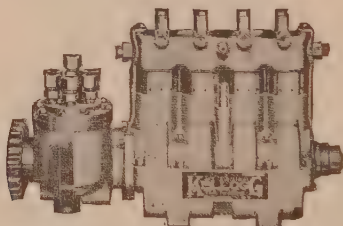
Kellogg self-starting system; view of pump and distributor. It is mounted on the engine and driven from some exposed shaft, such as water pump or cam shaft. A clutch is contained within the distributor for engaging the pump and can be operated from a convenient place on the dashboard. The distributor is timed at half the engine speed, so when the engine stops, it is in such a position that it will allow the air from the tank to rush into the proper cylinder and to each cylinder consecutively. Admitting the air from the tank to the distributor is accomplished by the simple pressure of a button on the dash. Aside from the foot valve, a hand valve is also provided as an extra precaution when the engine is to be left over night; 150 lbs. of air is carried in the tank.
